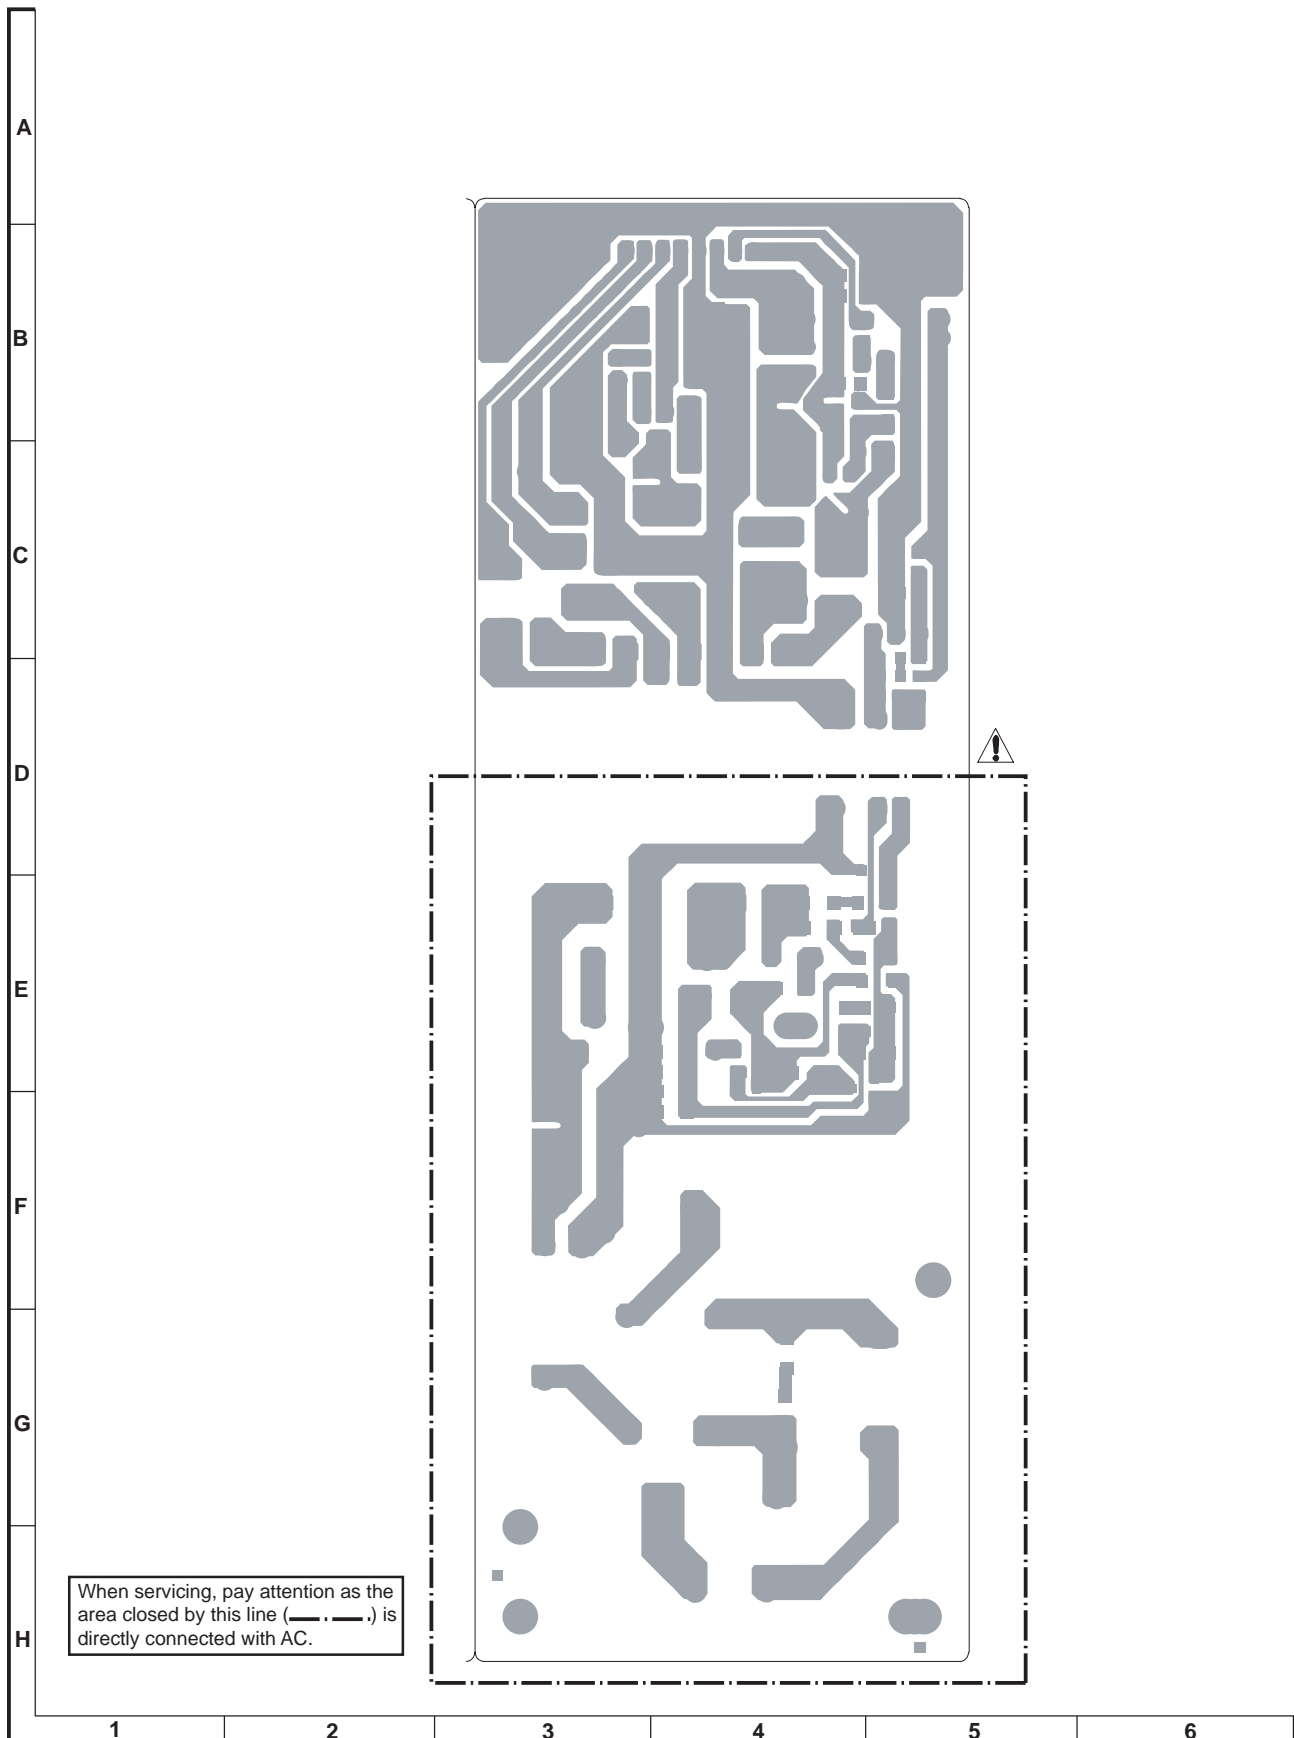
WIRING SIDE OF POWER PCB (BOTTOM VIEW)
